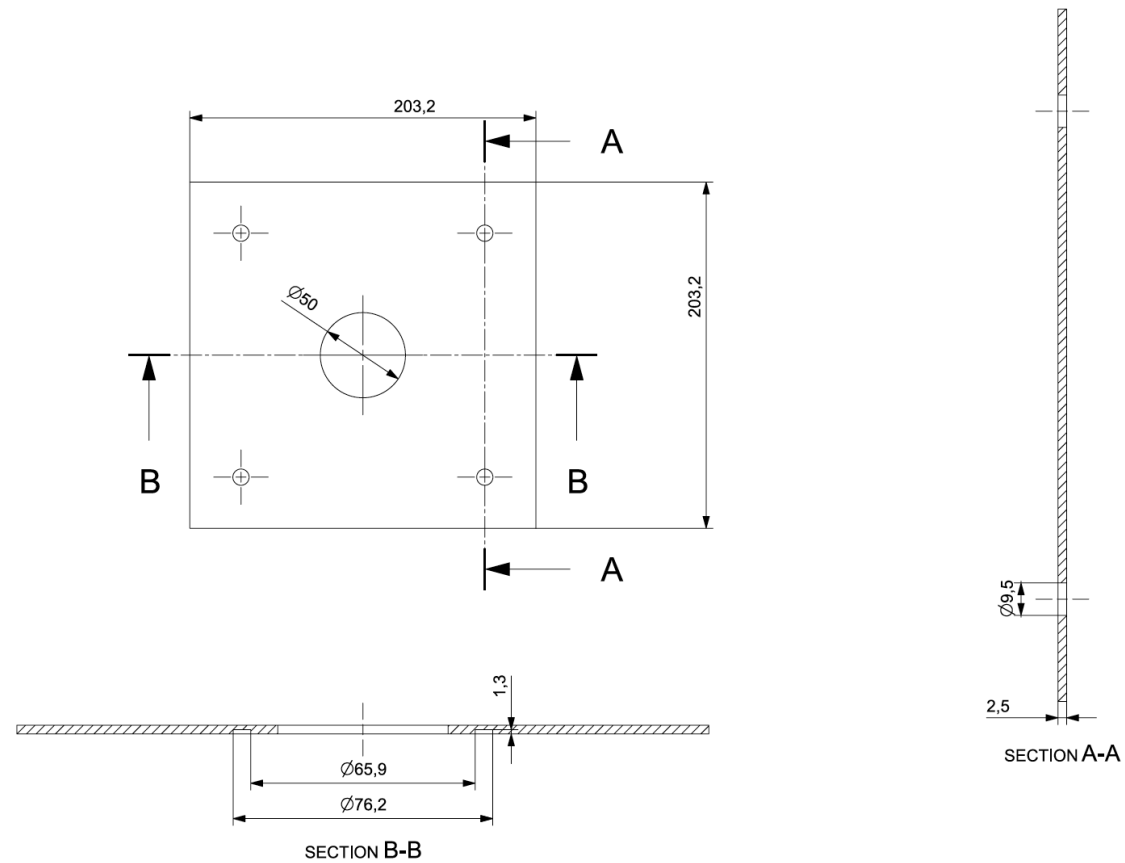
Aluminum plate for upper side of the glass cylinder. drawing with the hole for the thermocouple probe (1/16" diameter). The grooves for O-rings should be carefully fabricated. This drawing does not include significant tolerance.
